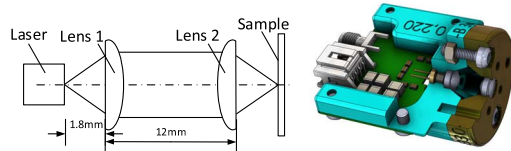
Lens system (left) and assembled laser probe (right) drawing.
